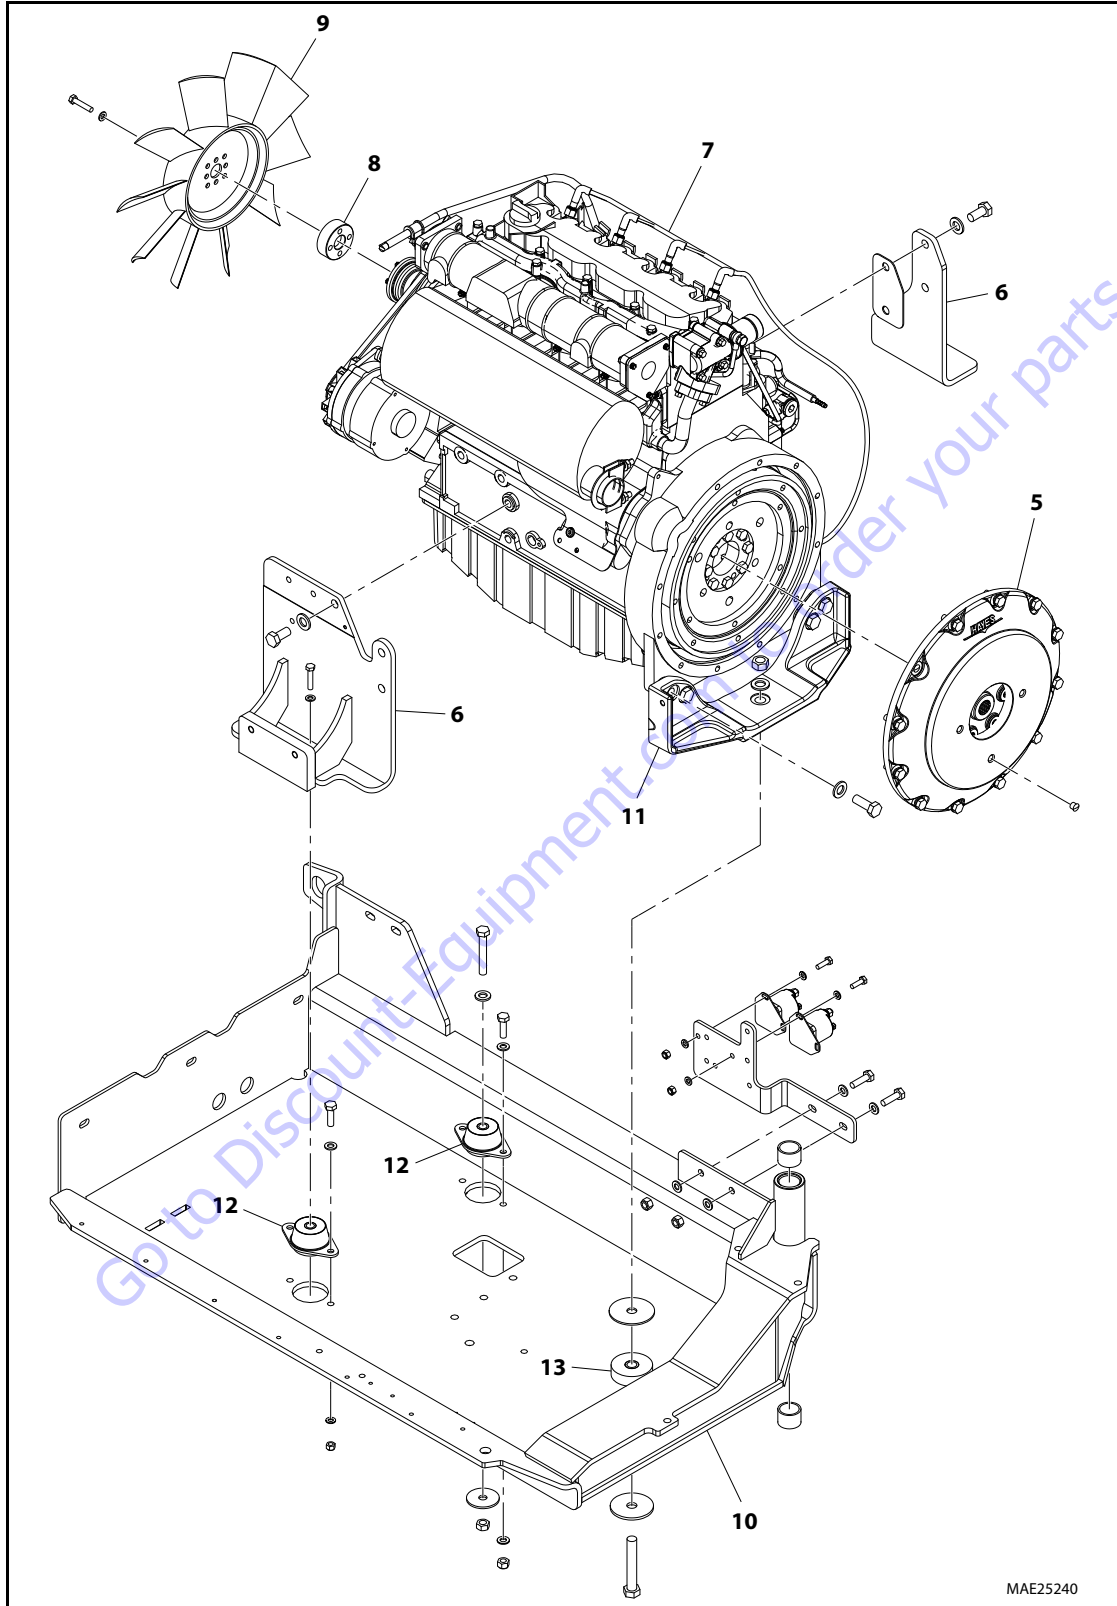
Deutz D2011 Engine Assembly - Sheet 2 of 2
